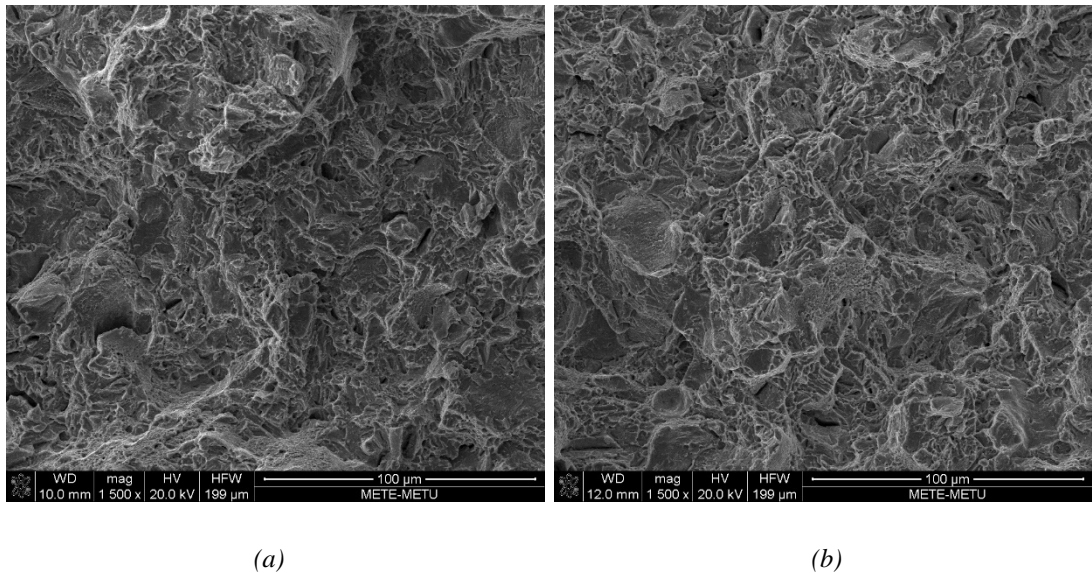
Fracture surfaces of the tensile test specimens of lower bainite transformed at 250°C, 5,5hr.
